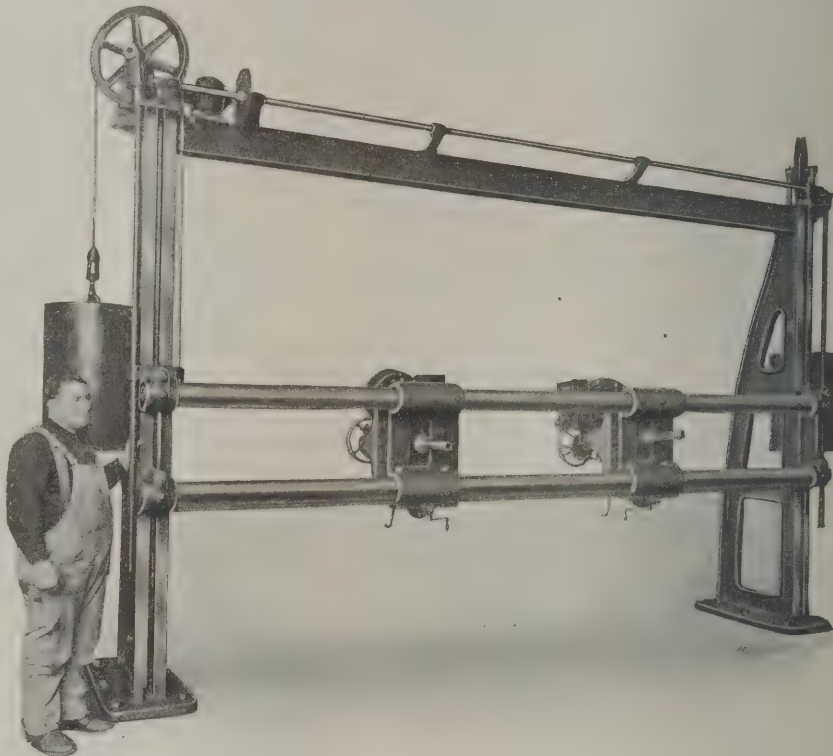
Dallett Motor-driven Drill for Rivet Holes in Boiler Shells.
